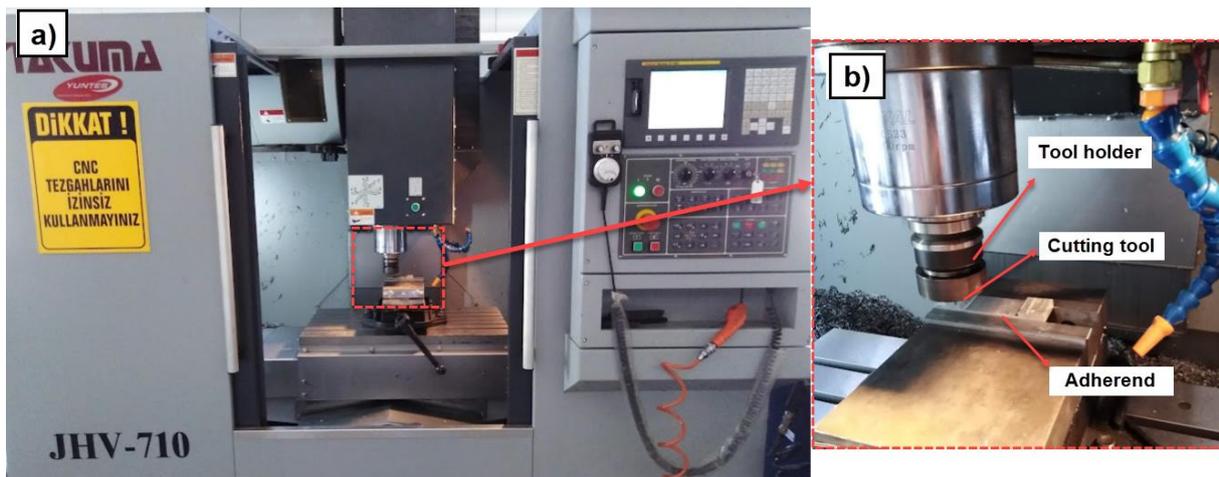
Machining of samples on CNC machine, a) the CNC vertical machining center utilized for the surface patterns, b) the image of the machining adherend
